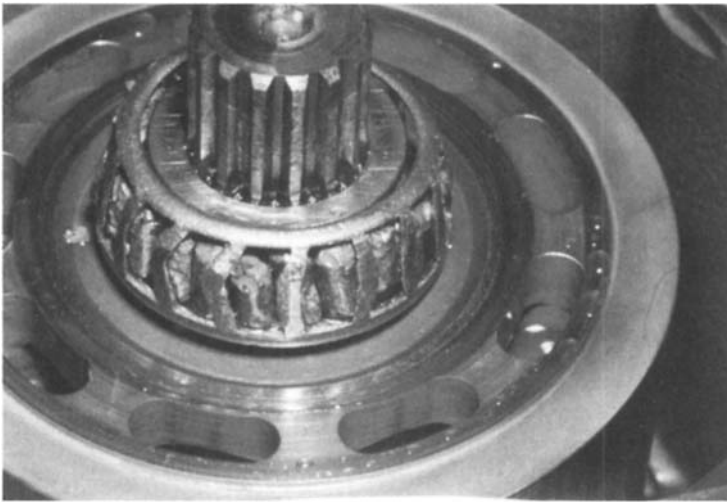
Damaged roller bearing from an axial piston pump with plastically deformed roller due to poor lubrication and adhesive wear. (Courtesy of DMT-Gesellschaft für Forschung und Prüfung mbH, Essen, Germany.)
